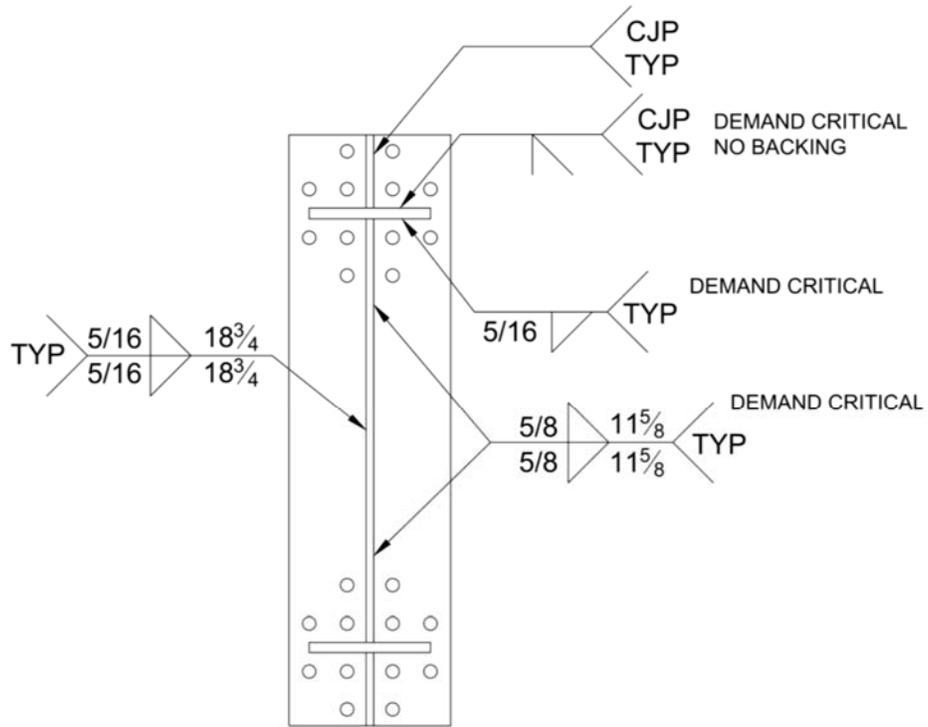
Beam to End-Plate Welds for Specimen 12ES-1.25-1.50-44
